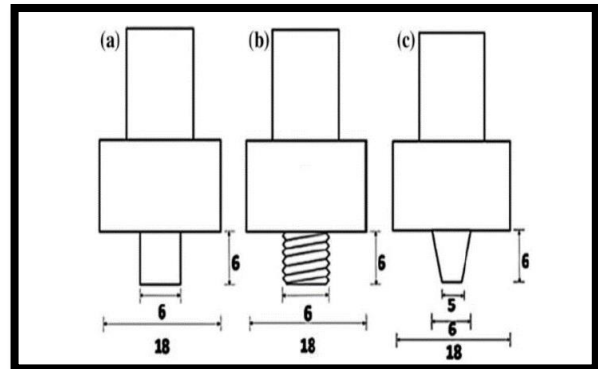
(a) Cylindrical pin. b) Threaded pin. c) Tapered pin[31].
